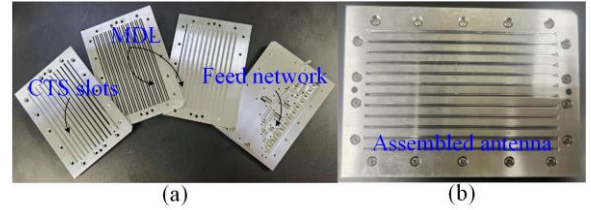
Photographs of the fabricated CTS LWA. (a) Blocks, (b) Assembled antenna.
